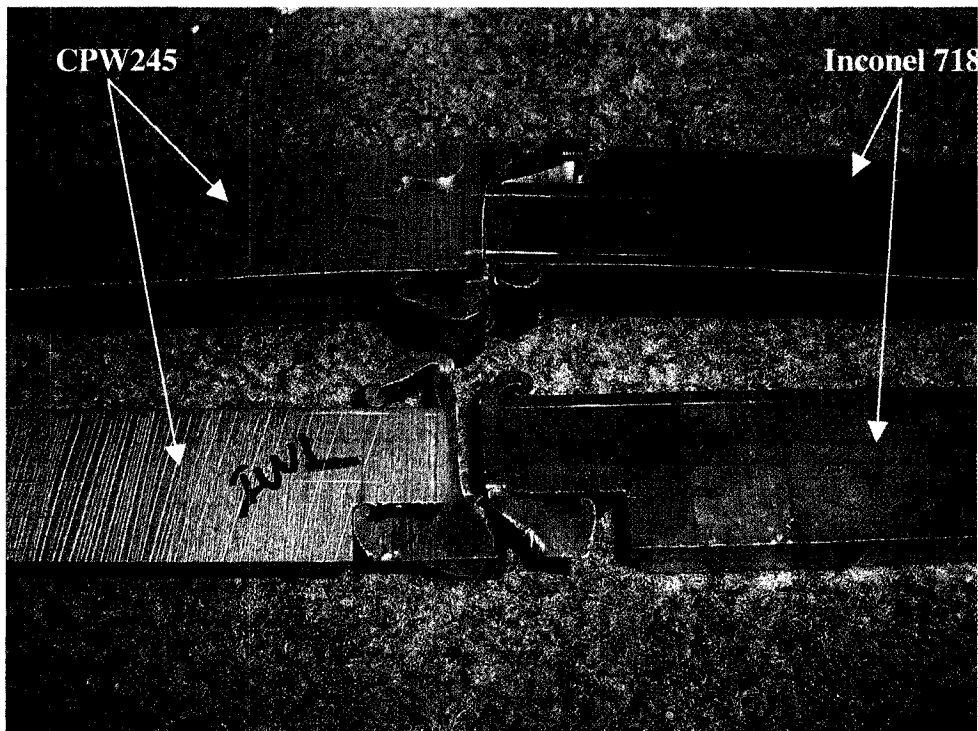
IW1 - Profile of the weld after tensile test
